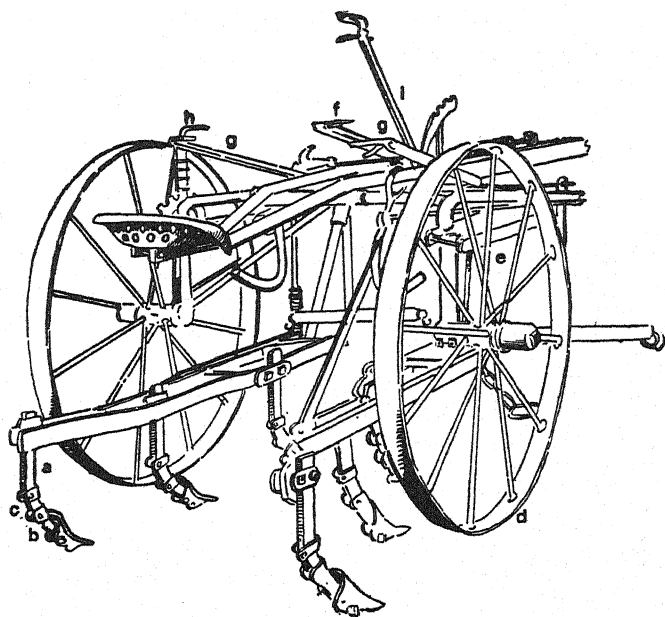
Construction and principal parts of six-shovel riding cultivator.
